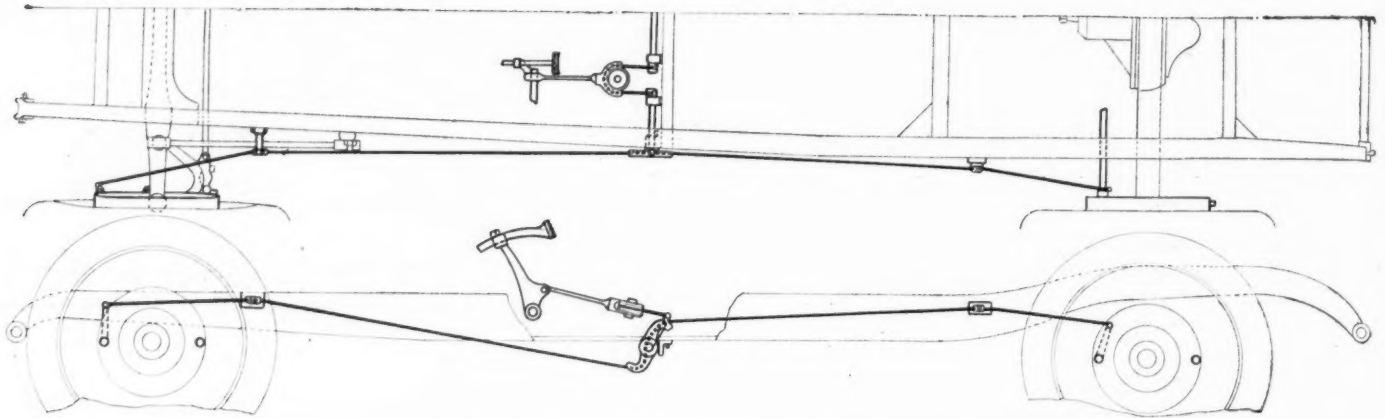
Landry four-wheel brake hookup. Cables are employed. Brakes on right and left of chassis are equalized by pedal sheave
